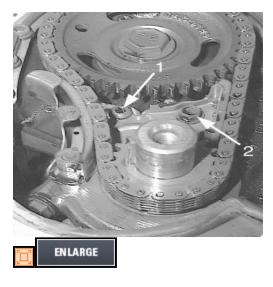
The timing chain tensioner is retained by a Torx head bolt (1) and a regular hex head bolt (2)
